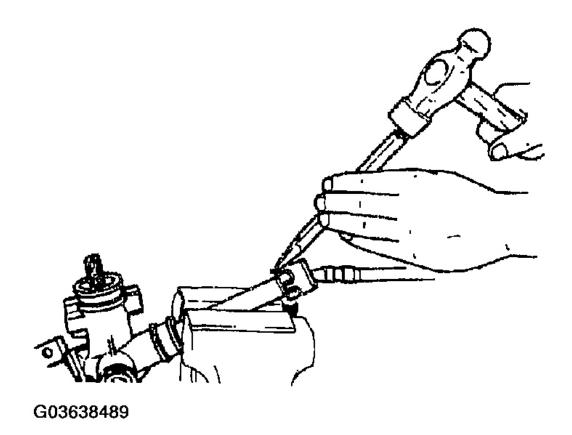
Removing Tie Rod Courtesy of MAZDA MOTORS CORP.
